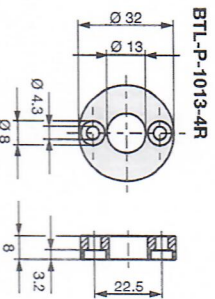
Thru-hole design for mounting BTL with O-ring
